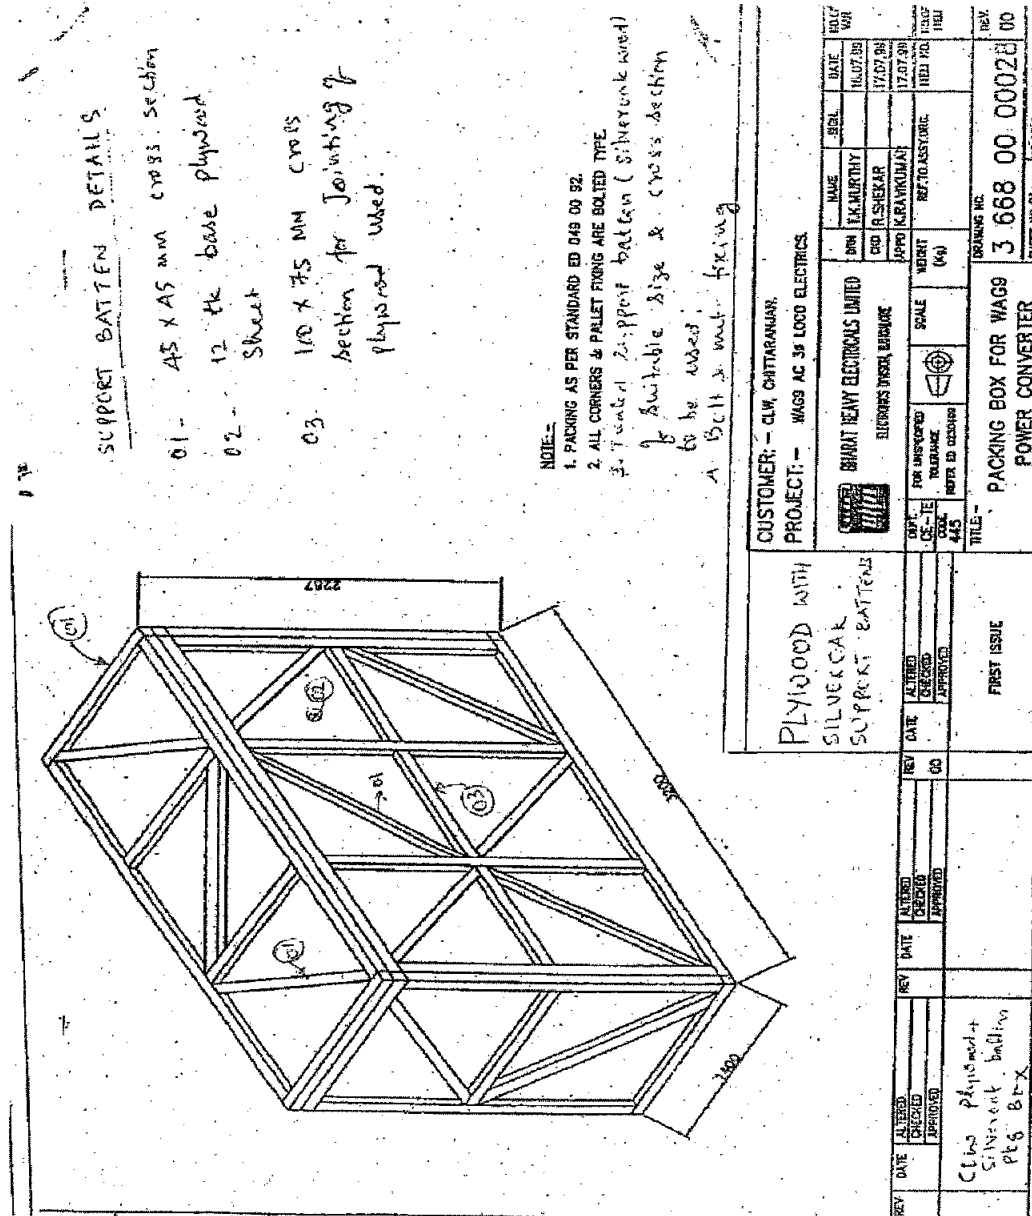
CLW Railways Panel Packing with Plywood & Silver Oak Battens
